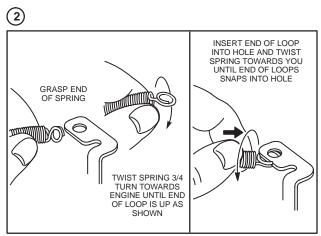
ASSEMBLE SPRING TO CONTROL LEVER
